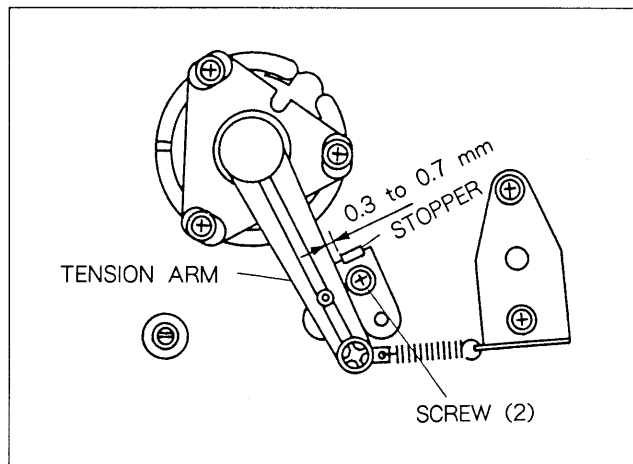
Tension Arm Stopper Clearance Check
